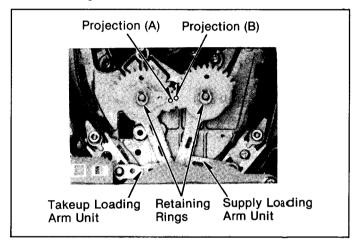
Assembly and Adjustment of Gears and Rod-(1)
